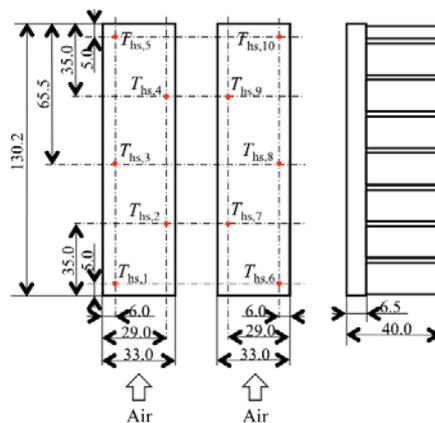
Details of heat sinks for device 2 (dimension in millimeter)
